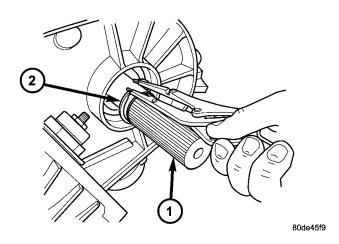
Remove Front Output Shaft Snap-ring -Typical
